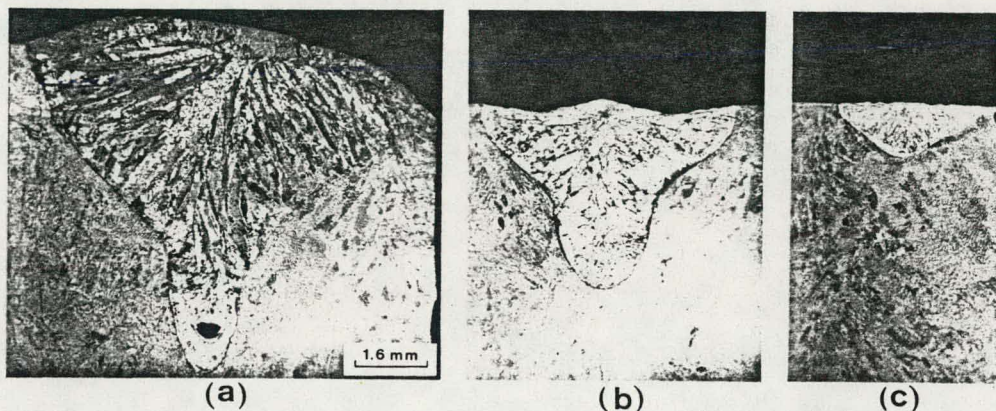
Macrostructure of the laser welds made at (a) 13, (b) 25, and (c) 63 mm/s.
